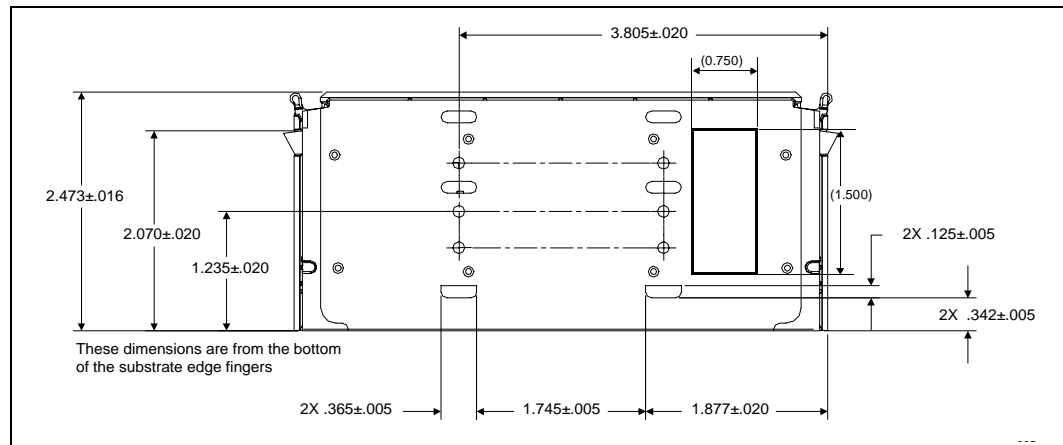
S.E.C.C. Packaged Processor — Bottom View Dimensions
